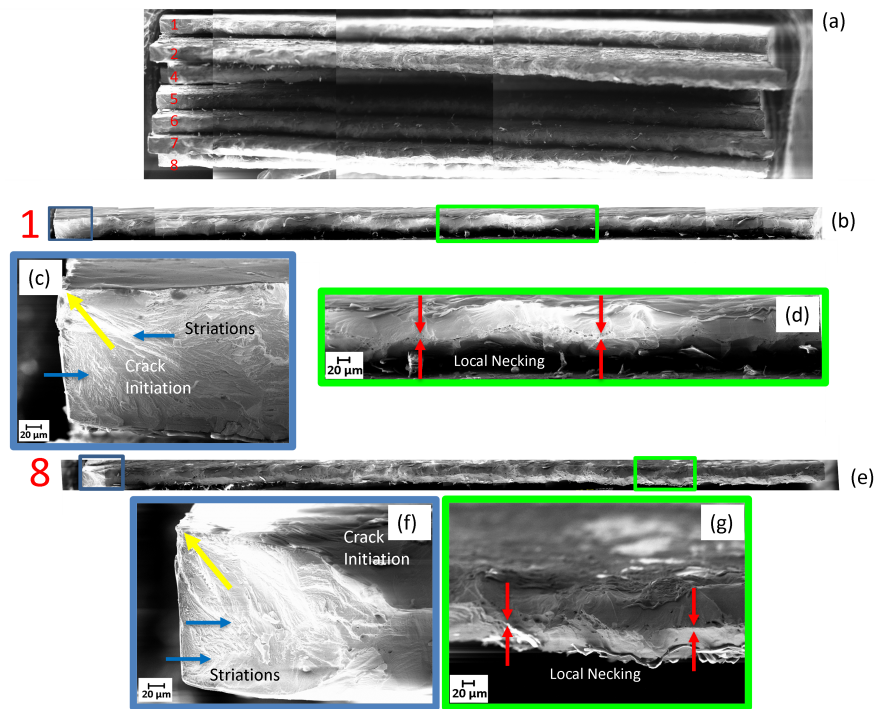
Fatigue sample for high temperature tested laminated sample, $N_f = 20,364$ cycles, (a) overall view of fracture surface (b) view of sheet 1 (c) crack initiation point of sheet 1 (d) some local necking on sheet 1 (e) view of sheet 8 (f) crack initiation point of sheet 8 (g) some local necking on sheet 8
